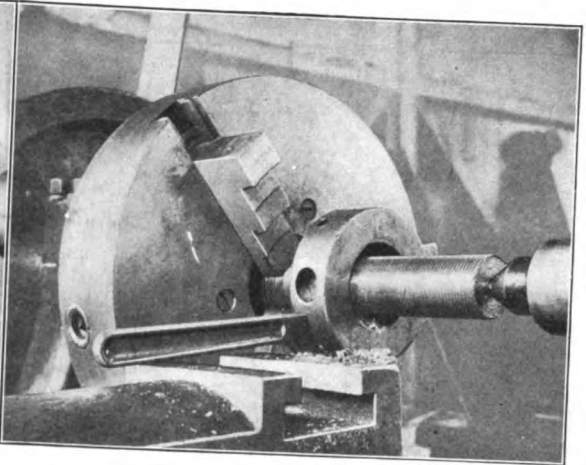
MACHINING THE ADAPTER BOTTOMS
